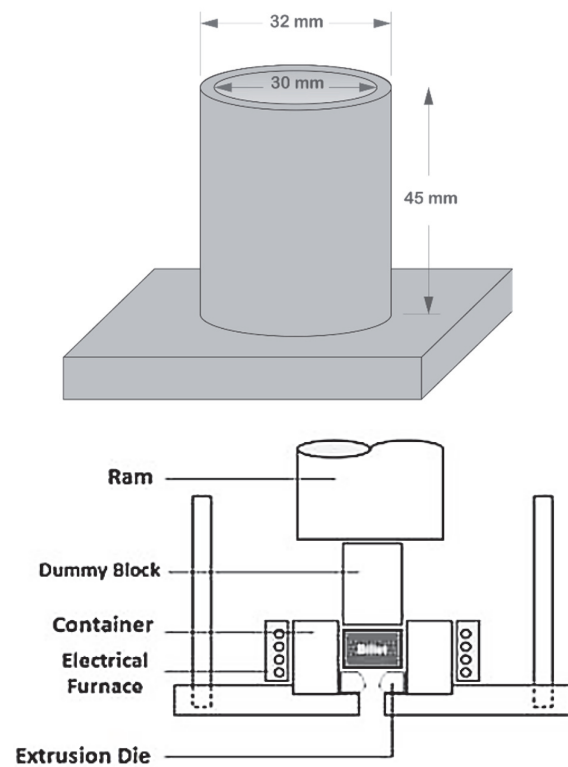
Schematic of cast iron mold and extrusion die apparatus.
